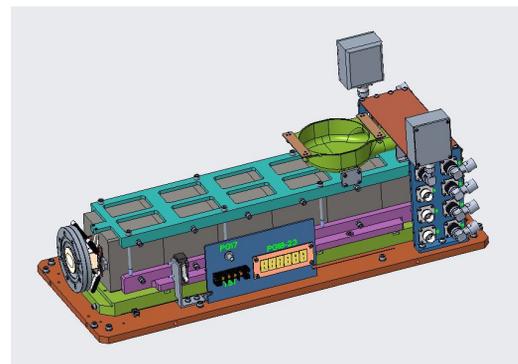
BTA ferrite-loaded kicker assembly without the cover.
